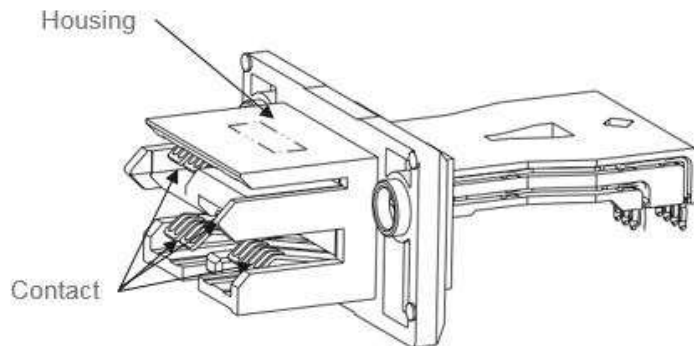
The Reference Product View of Pluggable Bus Bar PCB-mount Connector
